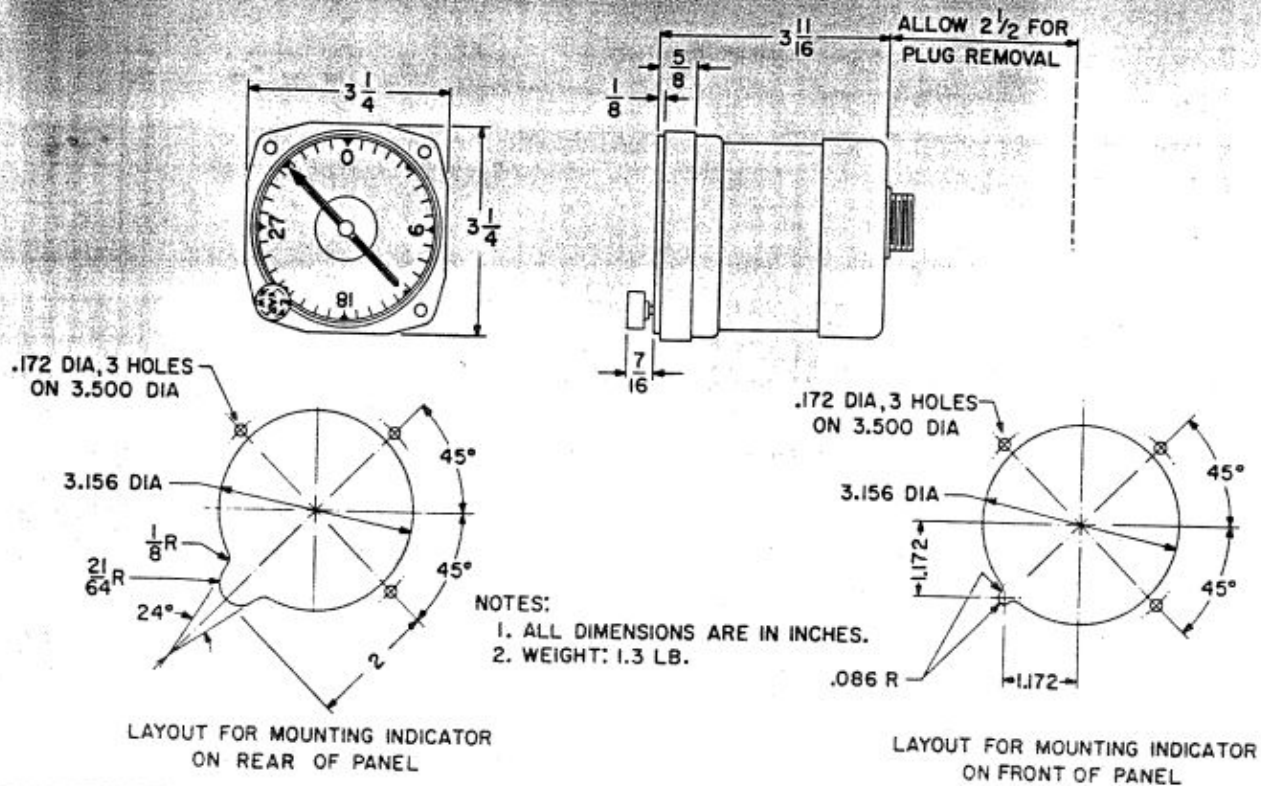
ARC Type IN-12 Indicator, Outline Dimensions
